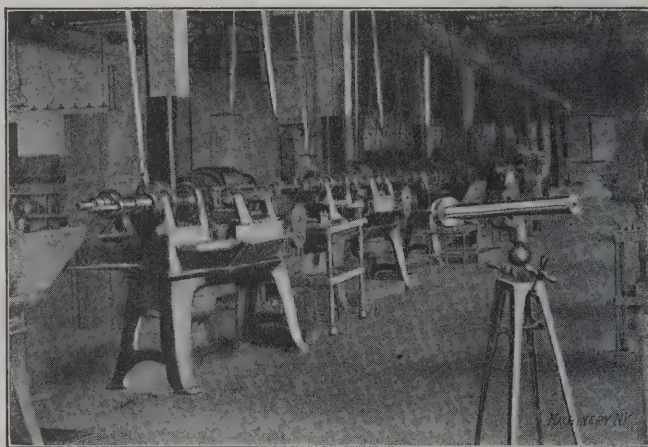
Battery of Automatic Screw Machines which make the Tool-holder Set-screws
